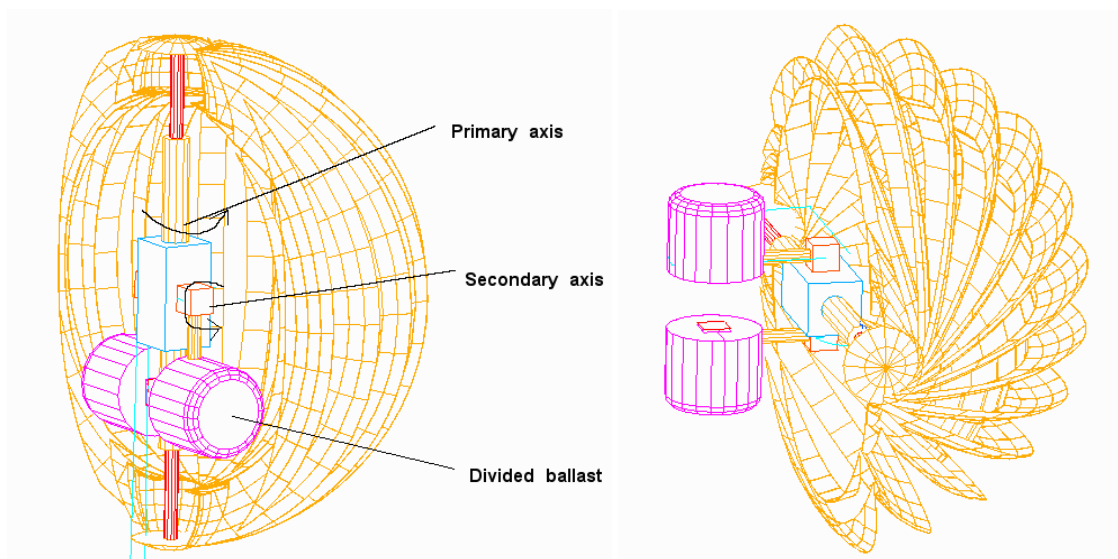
A Thistle with a steering ballast; turning position (left), rolling position (right). (Cut-away views).
